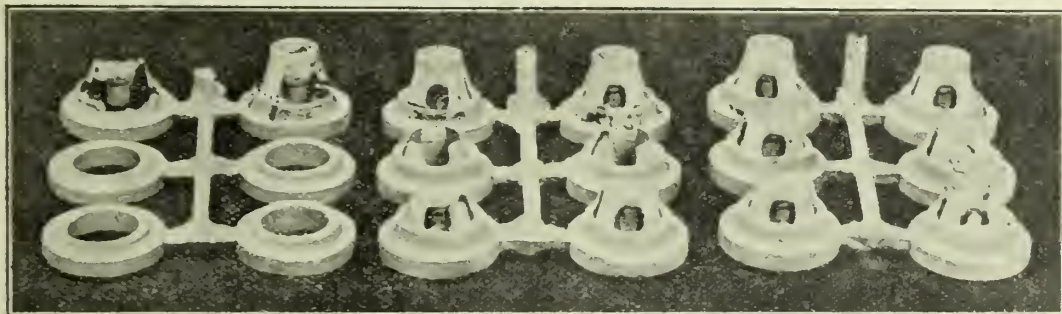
A TYPICAL EXAMPLE OF SHORT RUN CASTINGS.
